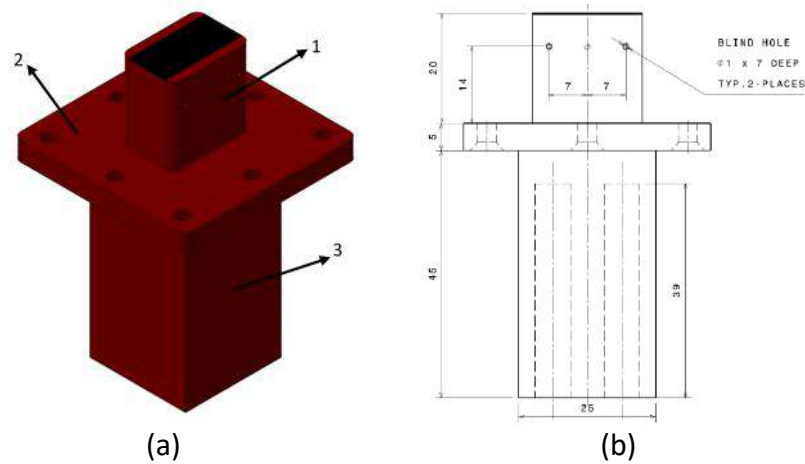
Aluminium block (a) Isometric view (b) Dimensional drawing
